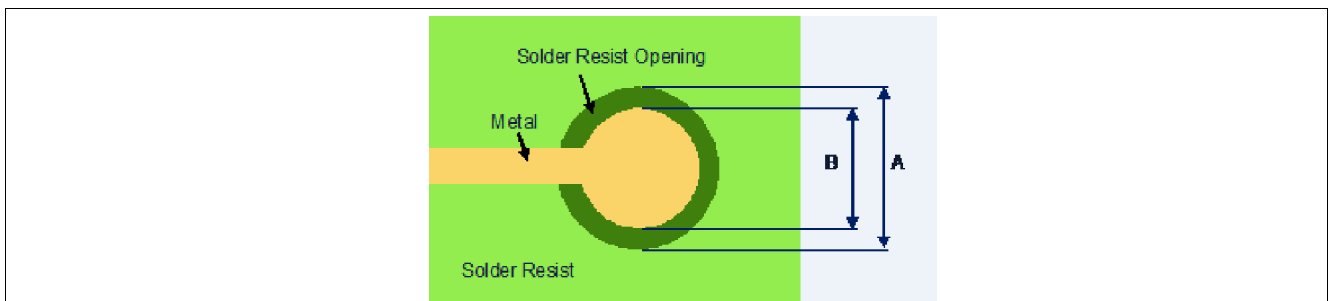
shows the NSMD pad. There is solder mask clearance around each copper metal pad. The dimensions and tolerances of this clearance must ensure that the solder mask does not overlap the solder pad (dependent on the PCB manufacturer's tolerances, 75  $\mu\text{m}$  is a widely used value).
